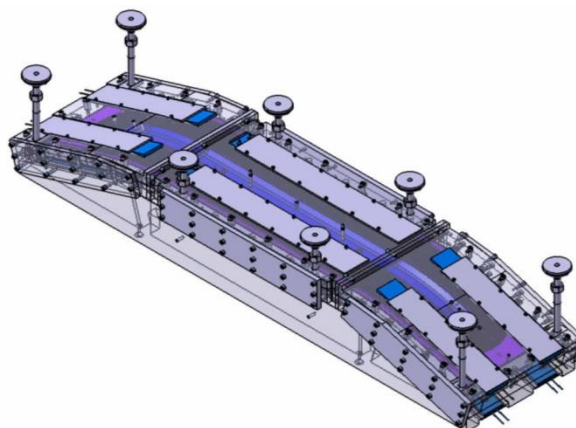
Impregnation mold of coil 3-4 (CAD view).
